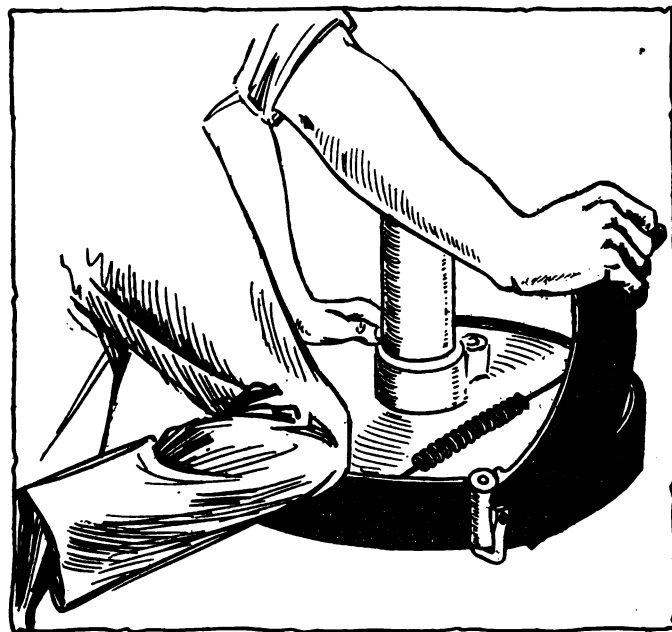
Step in the assembly of an expanding brake. Spring put on first
